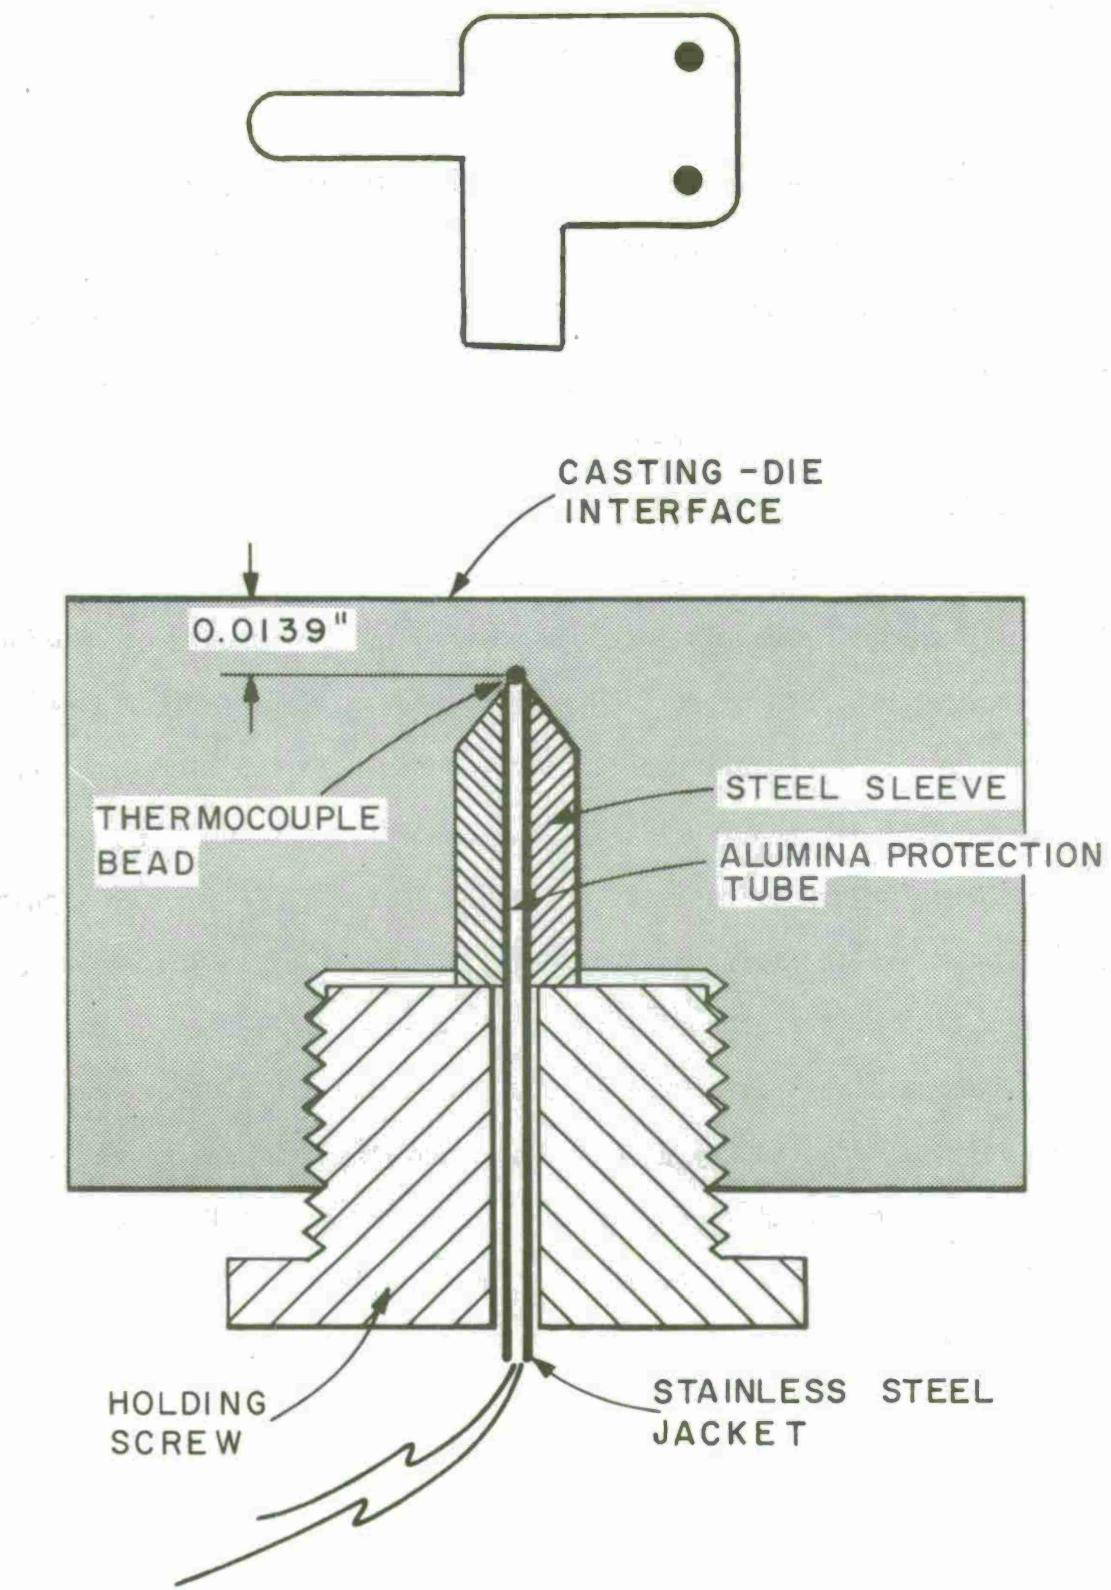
Schematic of thermocouple assembly in the low pressure die casting machine. Figure on top shows position of the thermocouple in the die cavity.
